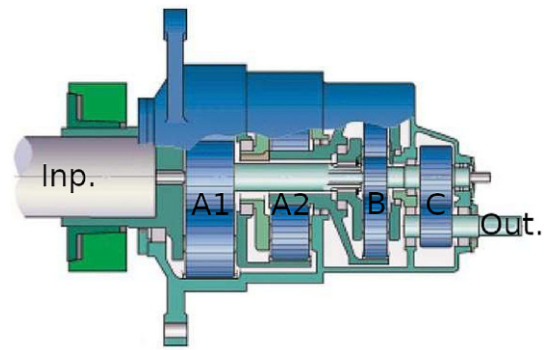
Schematic representation of the Bosch Rexroth GPV500 multiplier gearbox
